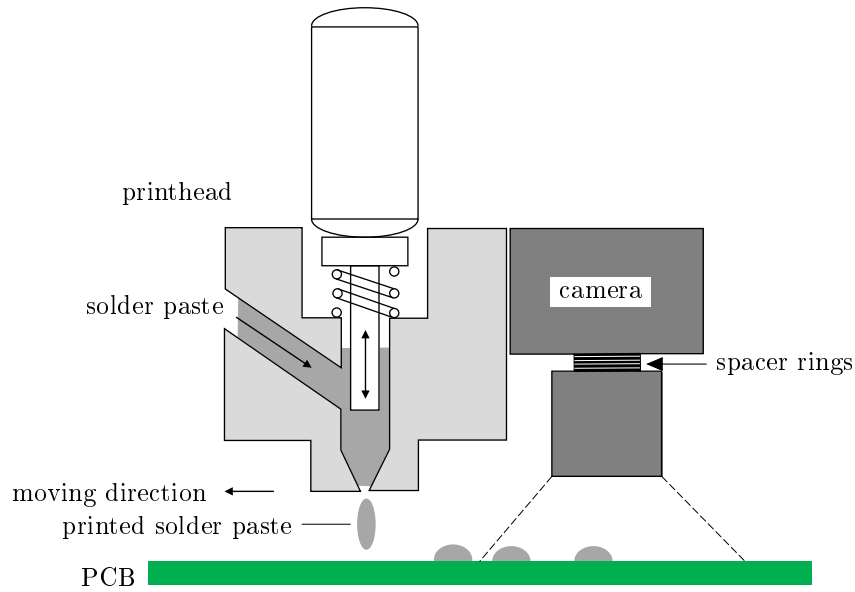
Schematic of printer head: solder paste is applied onto the PCB via a piezzo controlled ejector mechanism, a camera is attached to the printer head for the purpose of inspections. Spacer rings ensure a short working distance [adapted from Myd10b].
